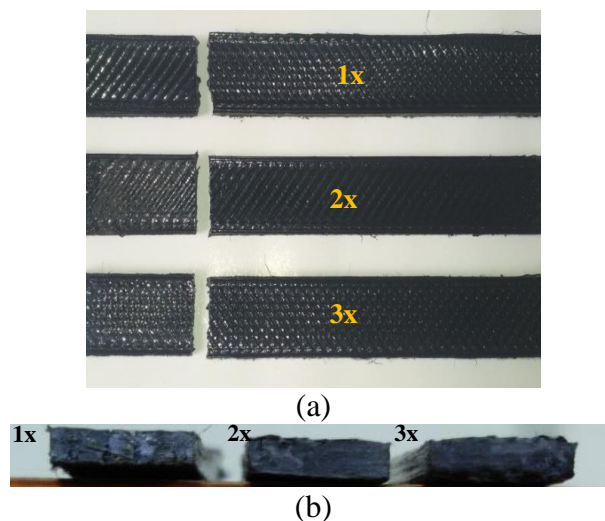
Tensile tested samples showing (a) brittle failure and (b) fractured surfaces in brittle mode.
